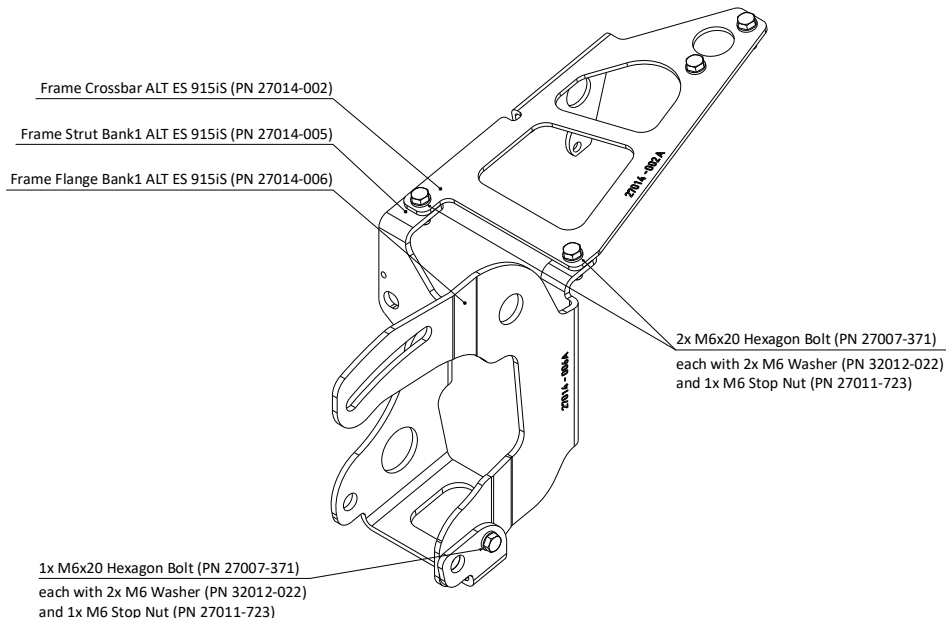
Isometric View Ext. Double Alternator Kit 2x 70A Rotax 916iS Frames Bank1
